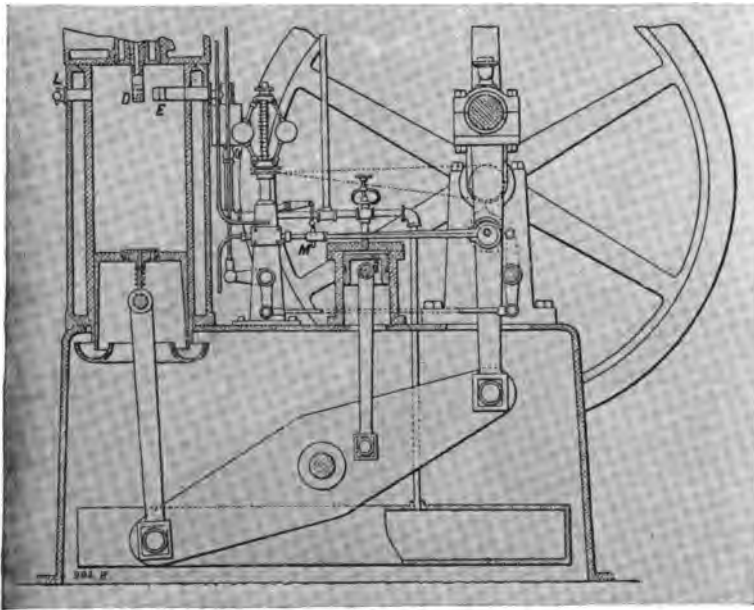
SECTIONAL VIEW OF BRAYTON ENGINE.
